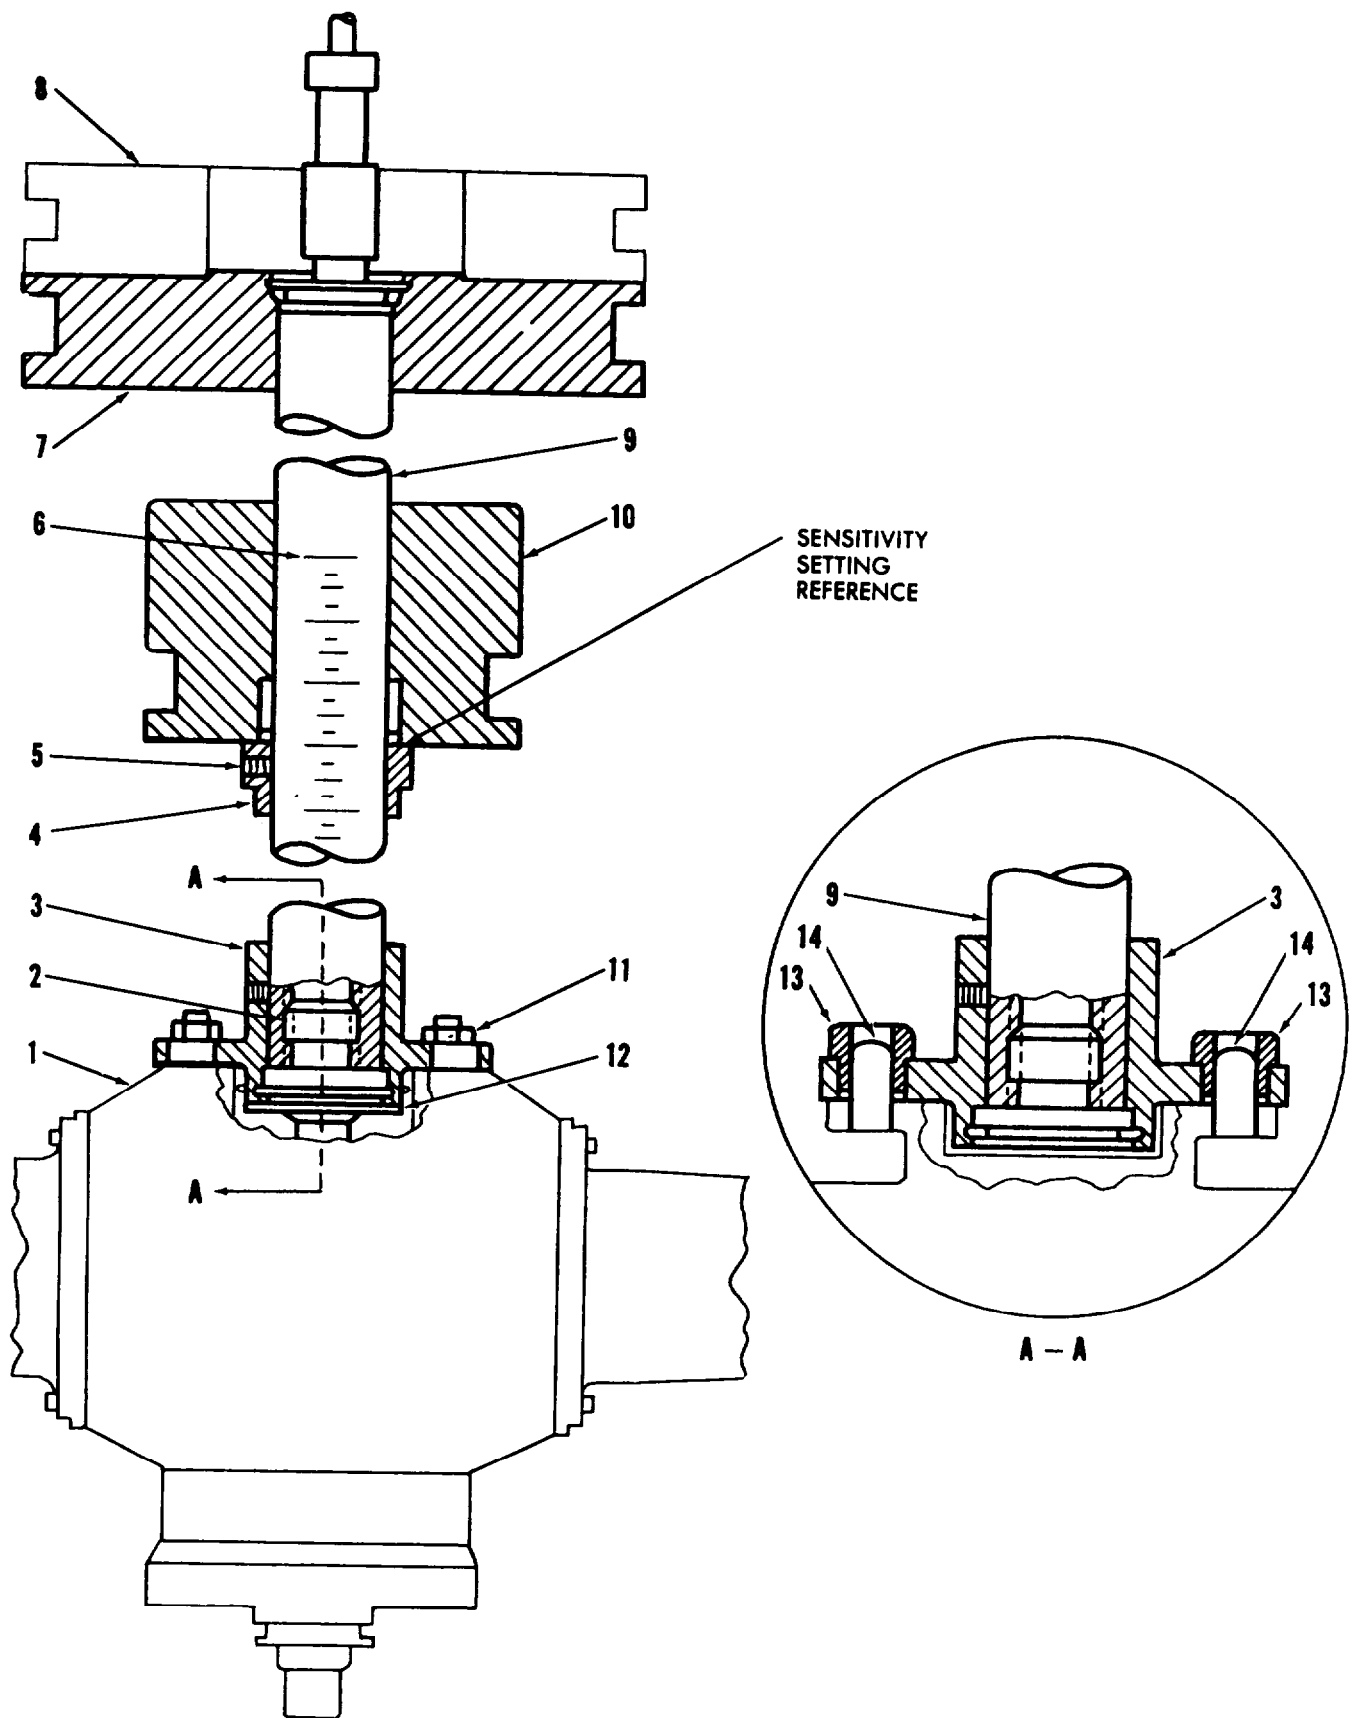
Typical Balancer Installation - Flange-mounted Propeller Assemblies Having no Center Hole for Installation of Balancing Arbor through Hub.
